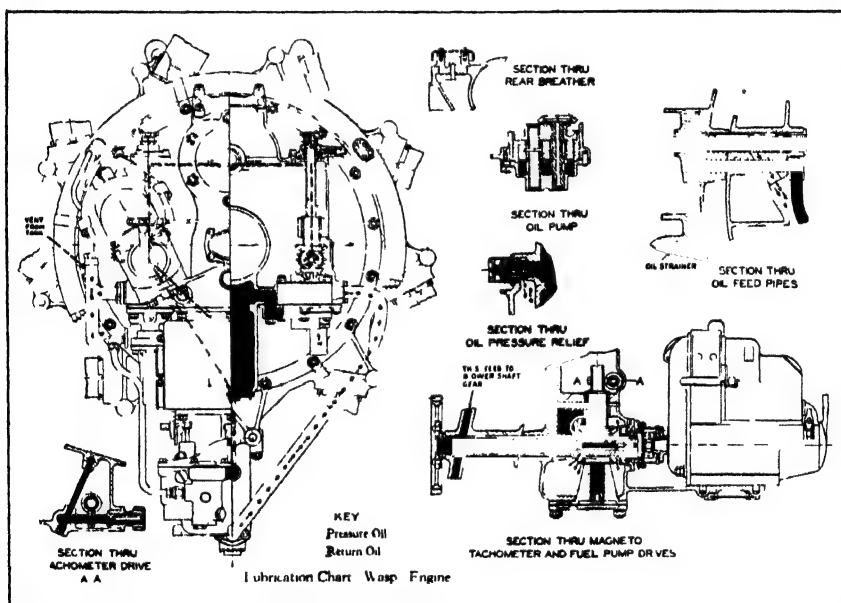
View Showing Methods of Lubricating Accessories of the Pratt & Whitney "Wasp" Engine.
